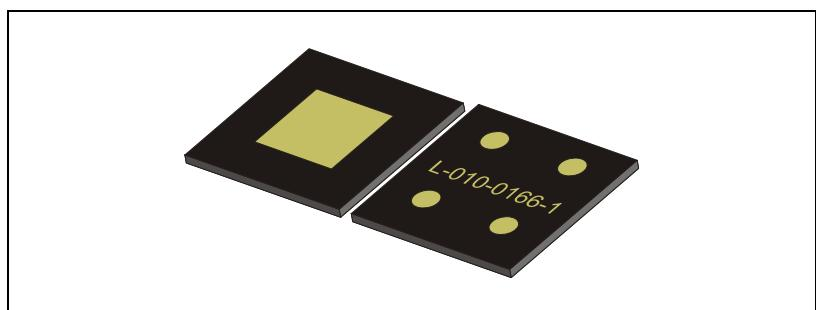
Calibration component (L-010-0166-1 HCOB ED-1)
